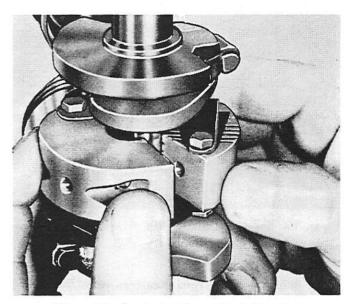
Replacing Center Main Bearing half of connecting rod bearing race to hold bearings in place.
